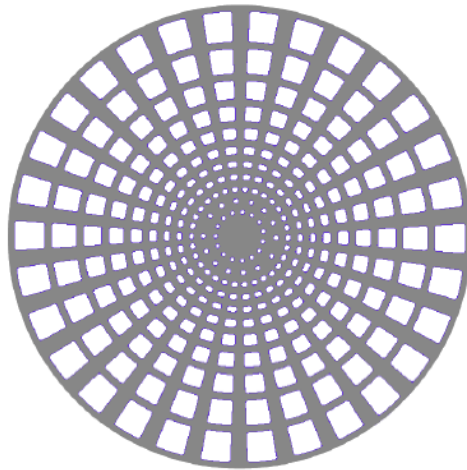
CAD drawing of the porous actuator discs used in this thesis.
